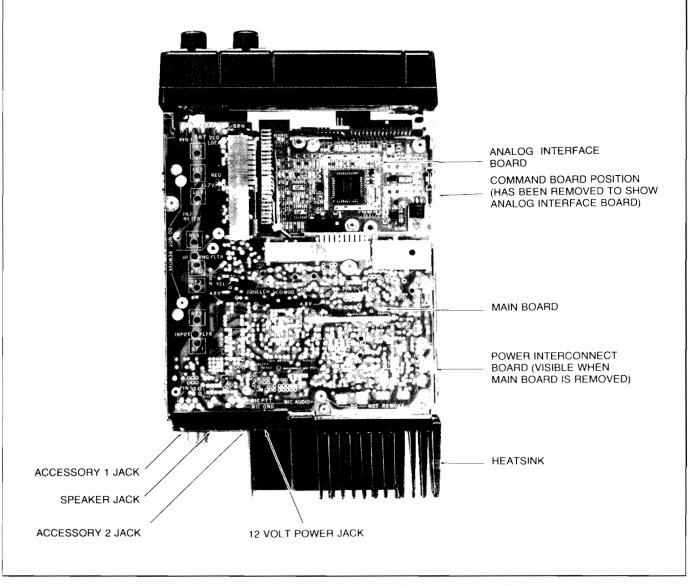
MCX1000 Radio Top View with Cover Removed
